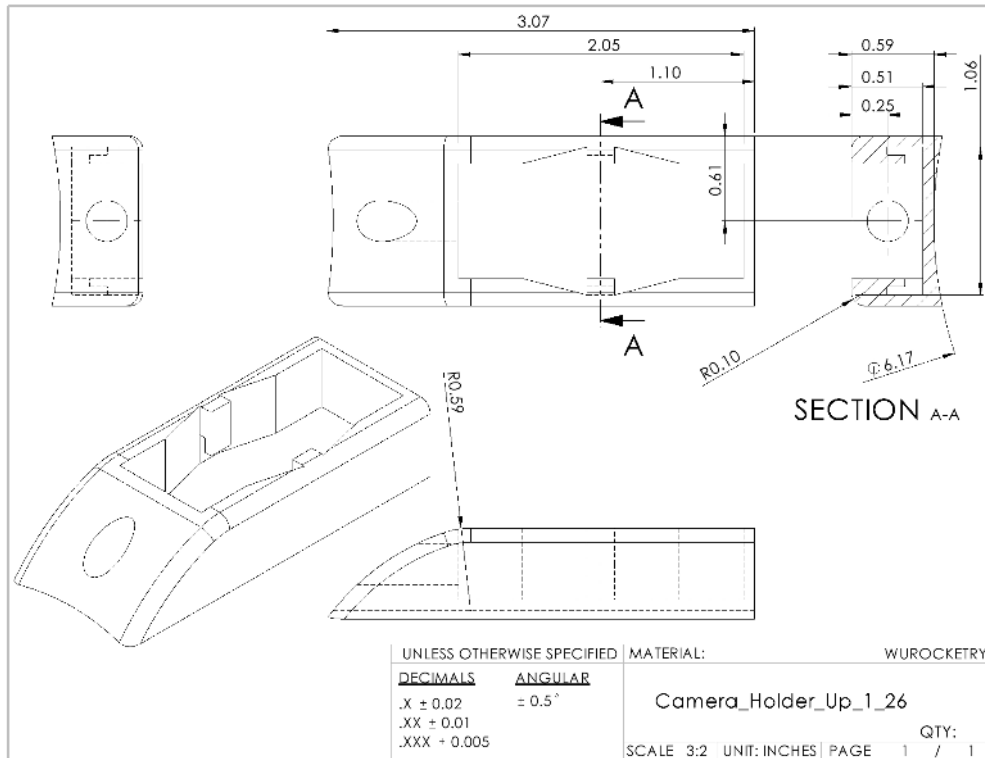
Dimensional Drawing of Upwards Facing Camera Holder
